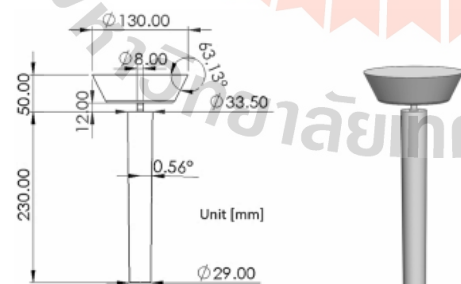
Dimensions of the test casting for microscopic examination and mechanical testing.
